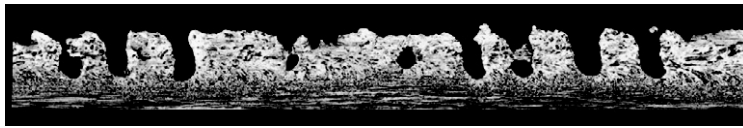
Longitudinal cross-section of a weld with many melt ejections.
